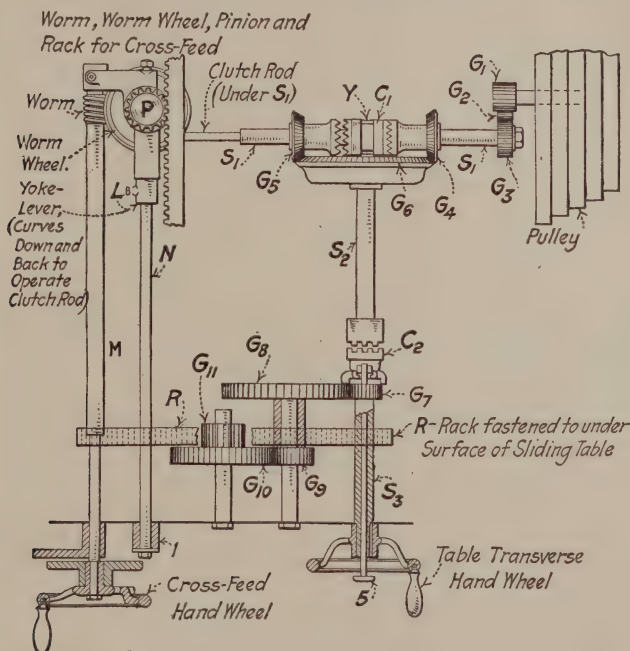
Table-feeding mechanism of grinding machine; also shows the worm, wormwheel, pinion, and rack for the cross-feed.
